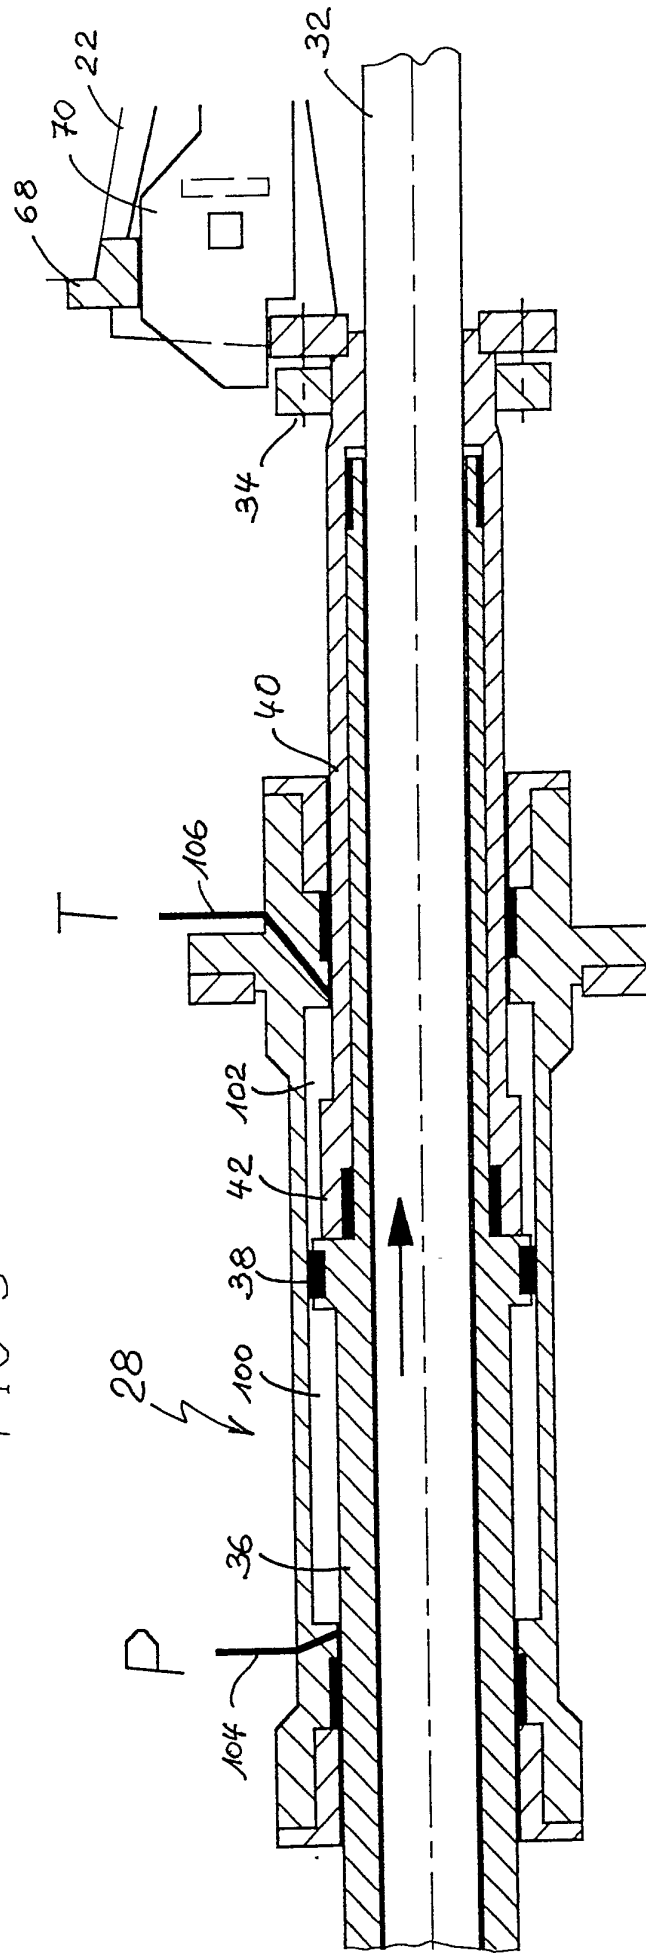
is a cross-sectional view of a multi-layered assembly 28. The assembly consists of several layers and components. At the top left, there is a component labeled 70 with a dashed line indicating a break or continuation. Below it is a layer labeled 68. To the right of 68 is a layer labeled 32. Further right is a layer labeled 34. Below 34 is a layer labeled 106. To the right of 106 is a layer labeled 40. Below 40 is a layer labeled 42. To the right of 42 is a layer labeled 102. Below 102 is a layer labeled 38. To the right of 38 is a layer labeled 36. Below 36 is a layer labeled 104. To the right of 104 is a layer labeled 100. A dashed line runs horizontally through the center of the assembly, with arrows pointing downwards from both ends, indicating a central axis or direction of movement. The entire assembly is shown in a cross-section with hatching used to differentiate the various materials or layers.
